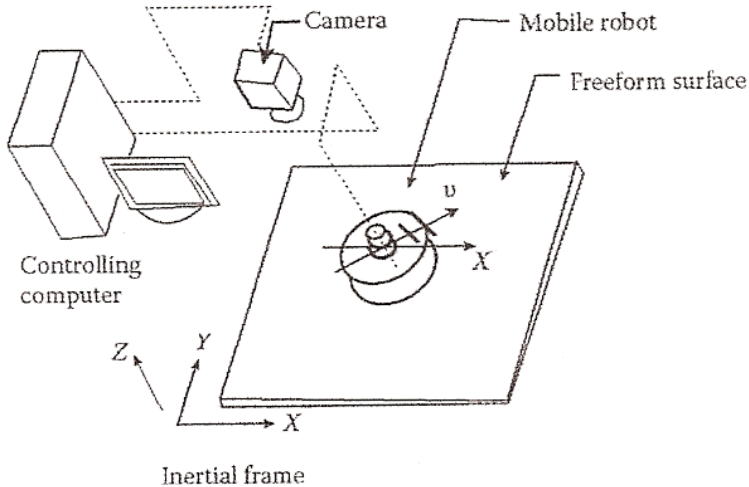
GPS guidance for help in manufacture and measuring large scale freeform optical parts
